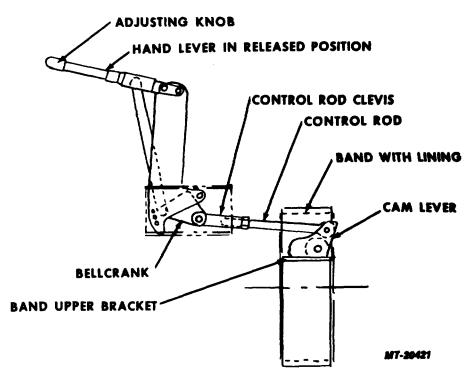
Parking Brake Adjustment with Orscheln Hand Lever
